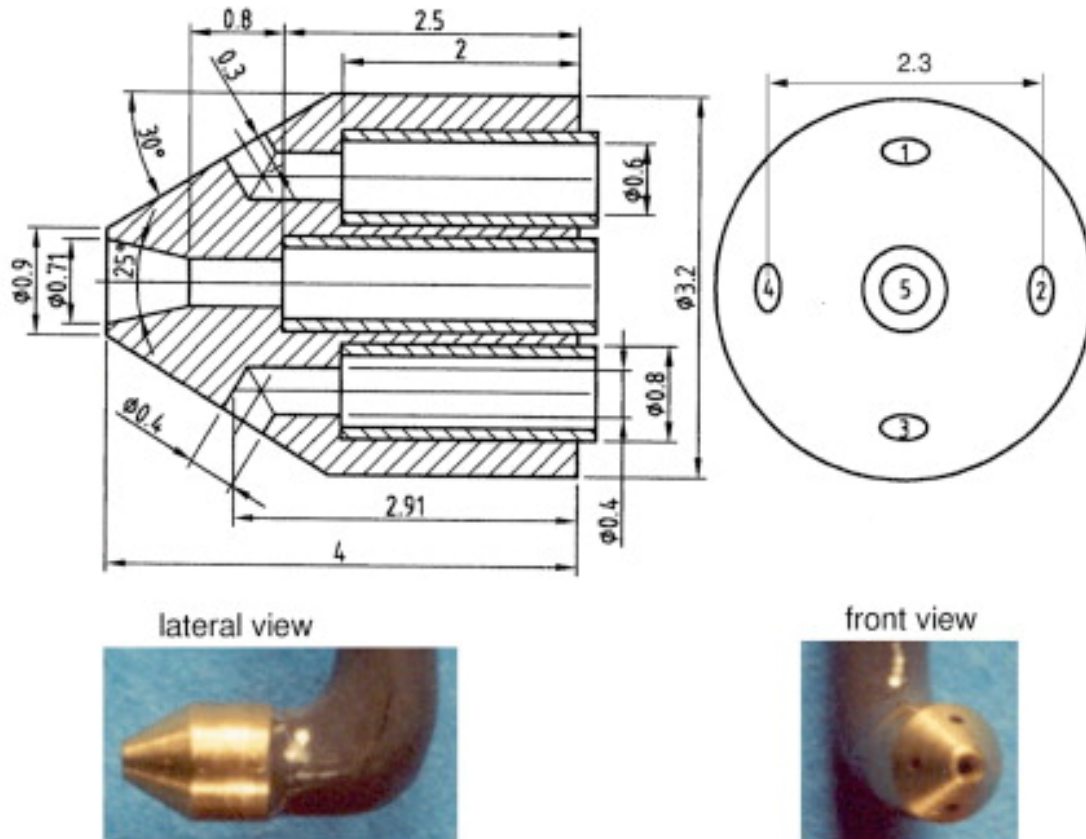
Five Hole Pressure Probe Technical Drawing [67].
